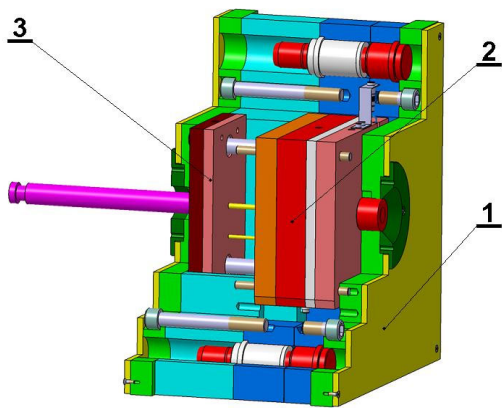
Assembly of injection mold; 1 – frame, 2 – injection mold, 3 – ejection system
